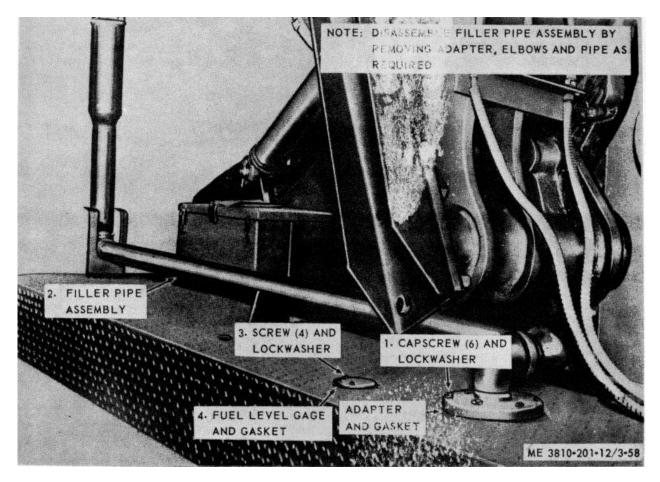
Filler pipe and fuel level gage (crane model 855Bg only), removal and installation.
